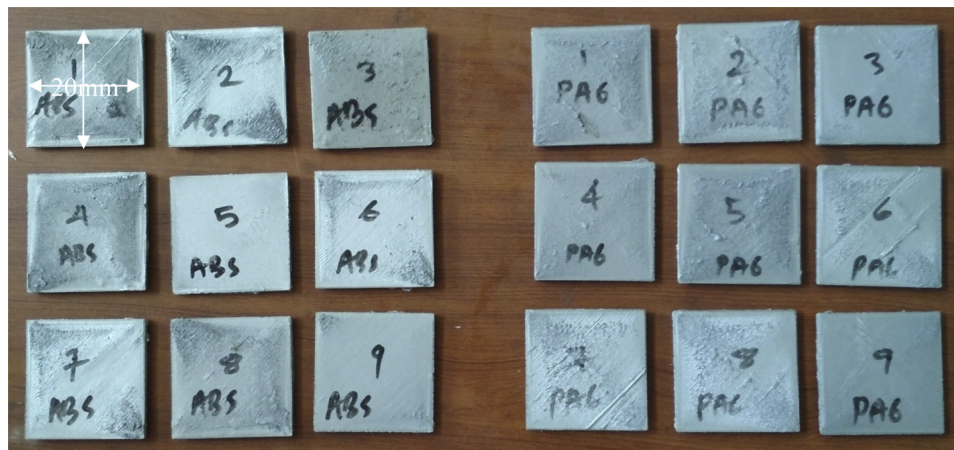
3D printed melt flow compatible Al reinforced ABS and PA6 specimen for welding.
